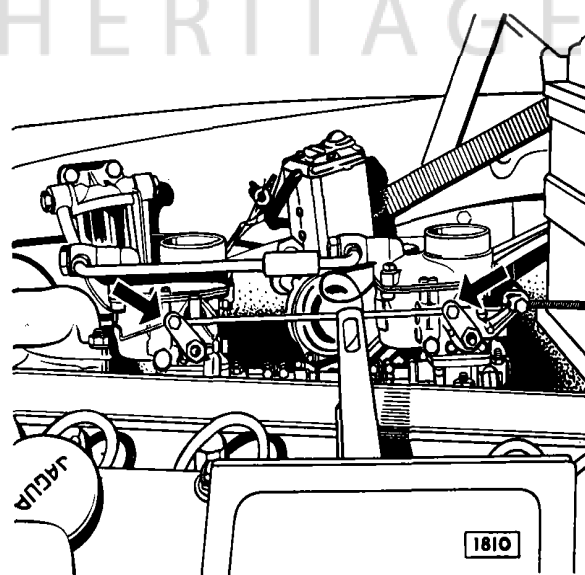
The mixture control wire should be connected with the carburetter levers pushed fully forward and with the manual lever on the fascia placed in the "Run" position.
